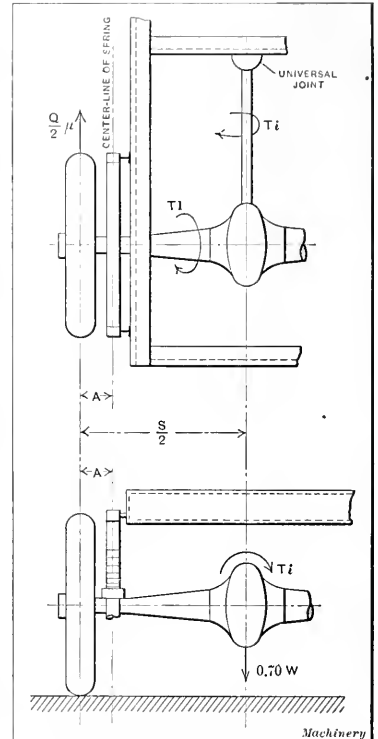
Diagram for determining Rear Axle and Housing Stresses with Shaft Drive
